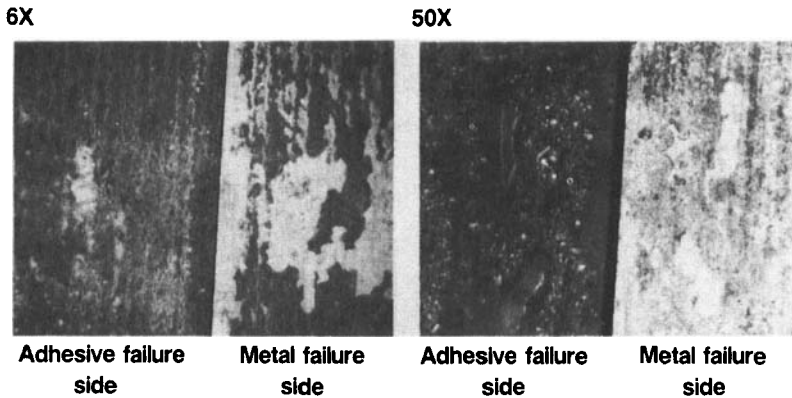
Fracture surfaces of EA-9649 bonded aluminum wedge crack specimens.
